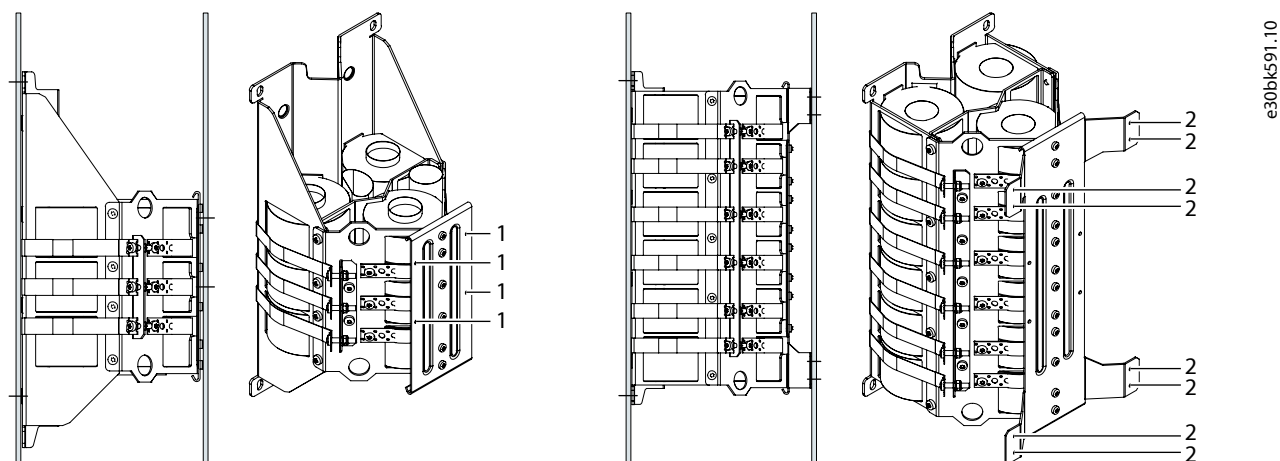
Mounting Holes on the Front Support Plate of the Inductor
